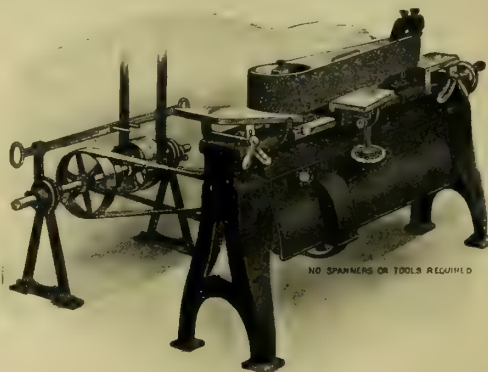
UNIVERSAL WOODGRINDING MACHINE. MESSRS. THE JUDSON-JACKSON CO., LONDON.
